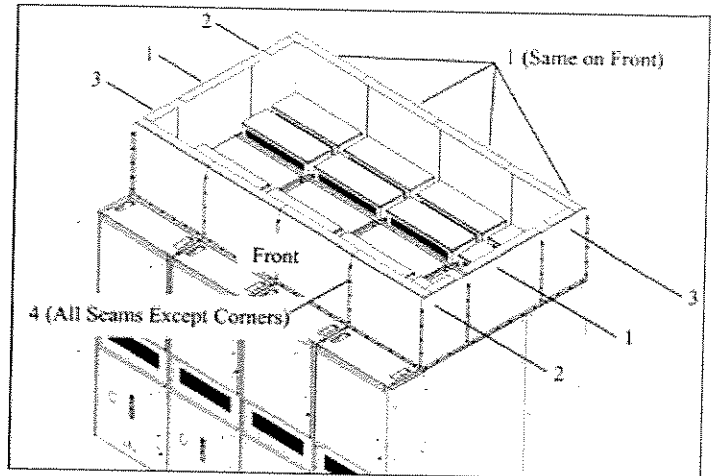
Installing the Remaining Arc Exhaust Wall Vertical Panels.
